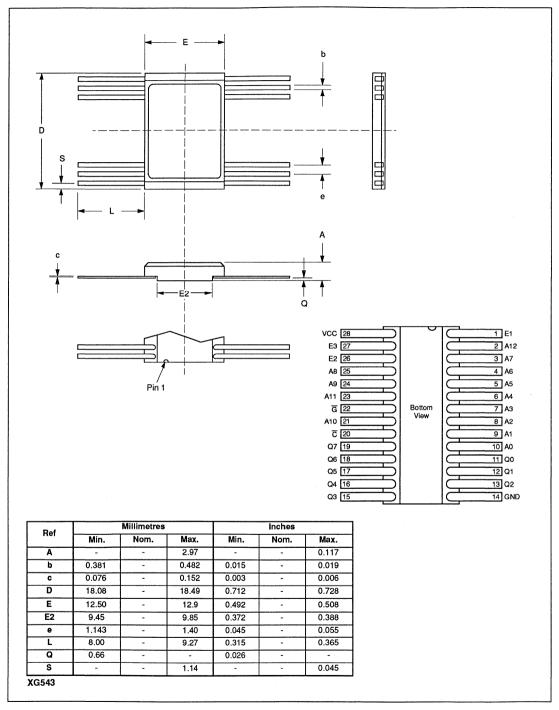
28-Lead Ceramic Flatpack (Solder Seal) - Package Style F
